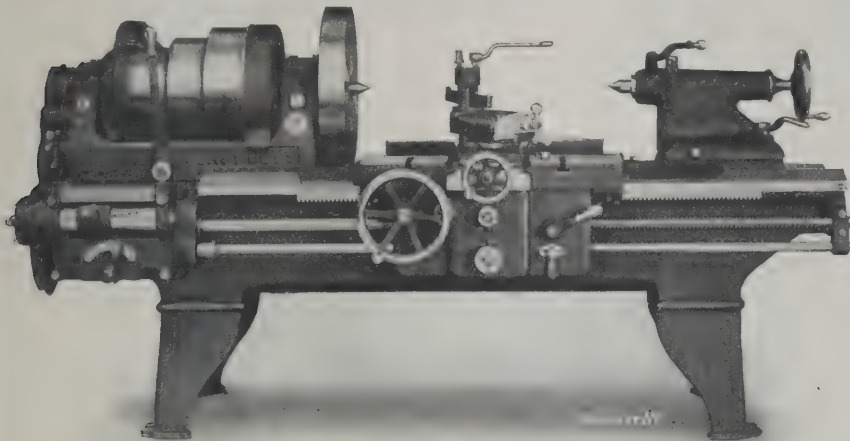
R. K. LeBlond Machine Tool Co.'s 20-inch Heavy-duty Engine Lathe
